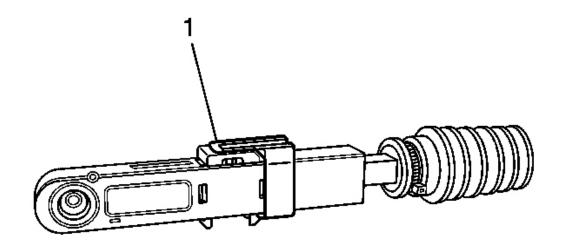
View Of Secondary Lock Tab Courtesy of GENERAL MOTORS CORP.
